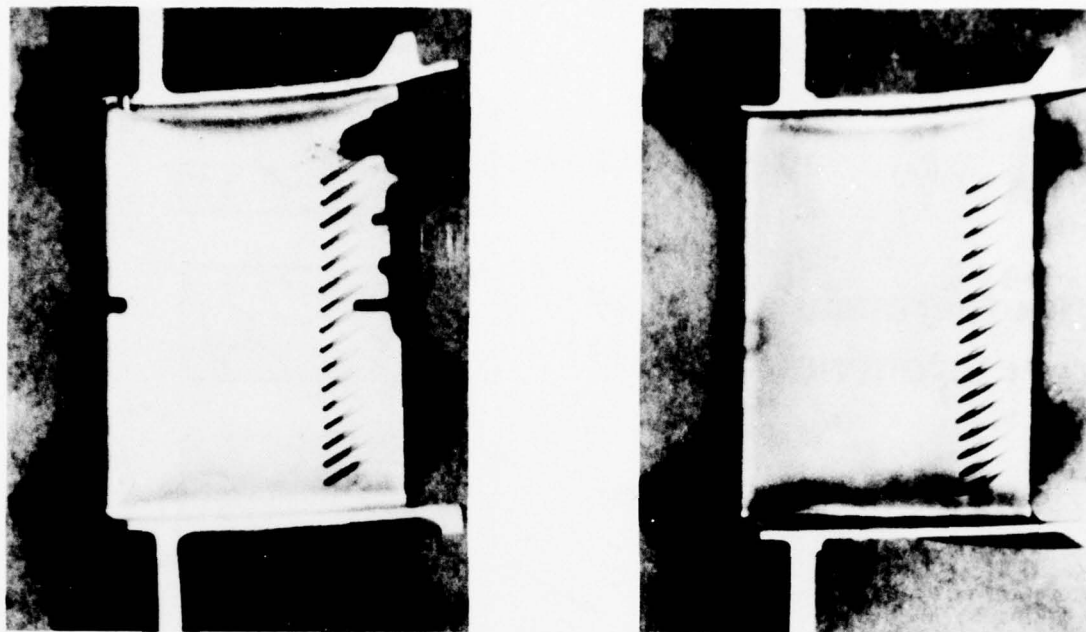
TURBINE VANE WHICH IS WELD REPAIRED FOR RESTORATION TO SERVICE. LEFT - CRACKS GROUND OUT; RIGHT - WELDED AND BLENDED TO CONTOUR.
